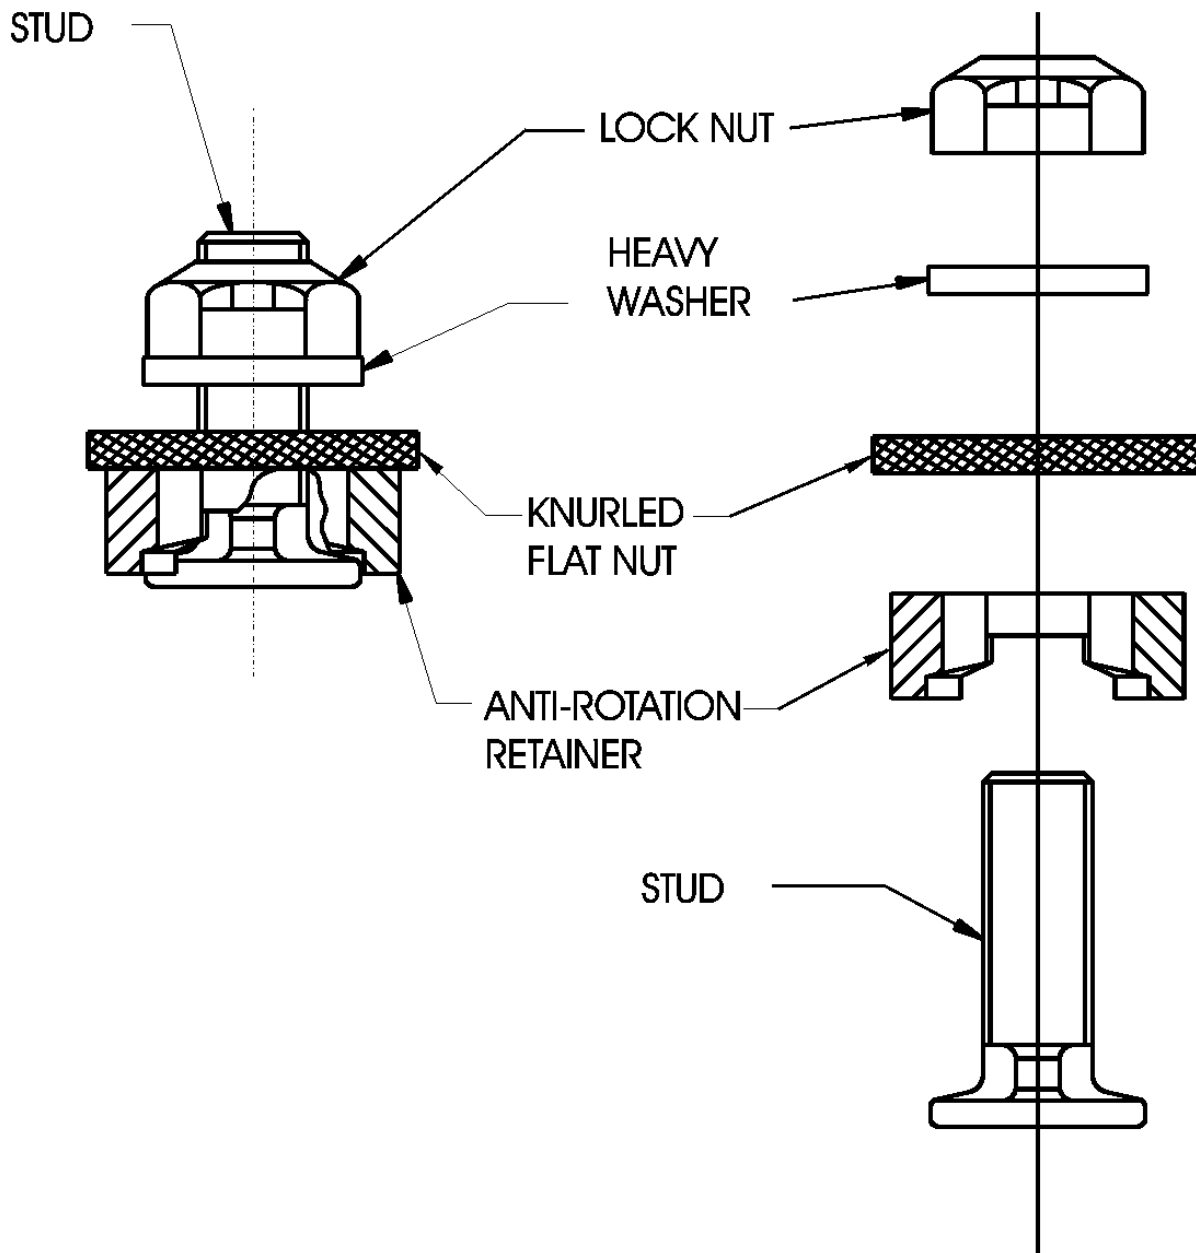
Light-duty Fitting shown in Assembled and Exploded Views
